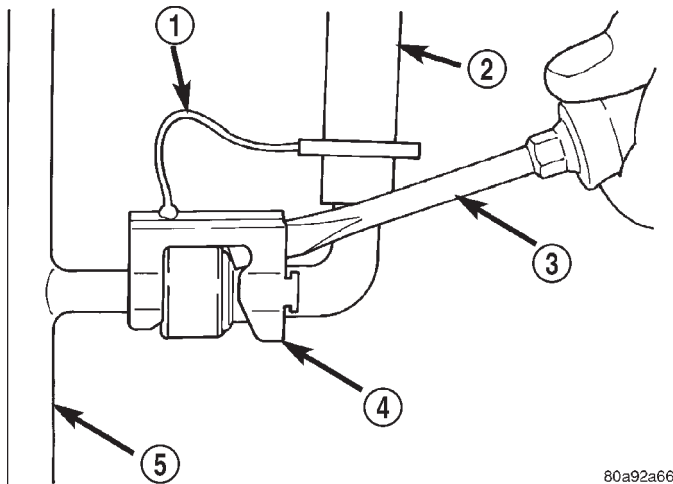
PLASTIC RETAINER RING TYPE FITTING
